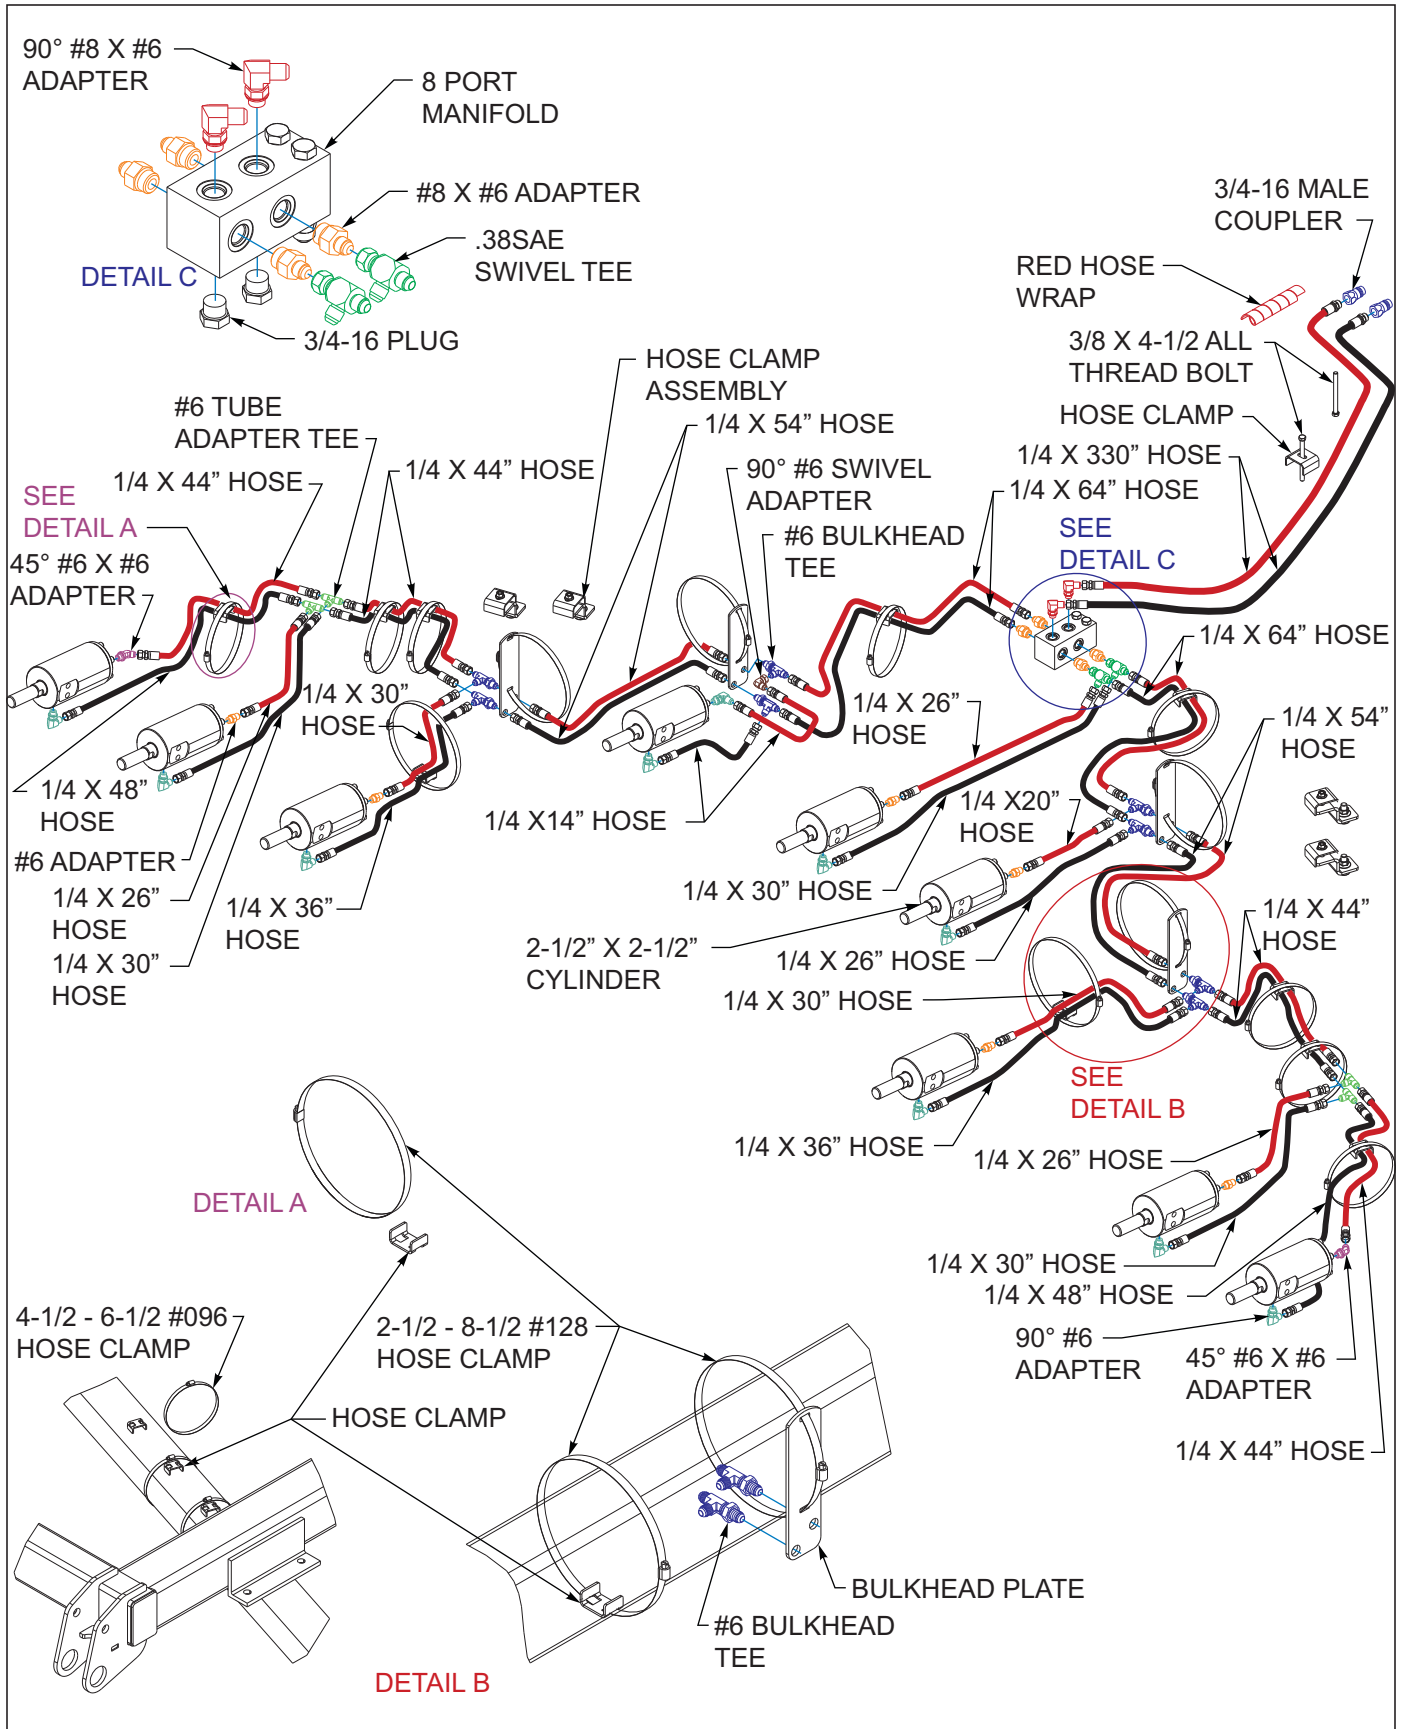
Hydraulic Double Reel Assembly 6231-30'
